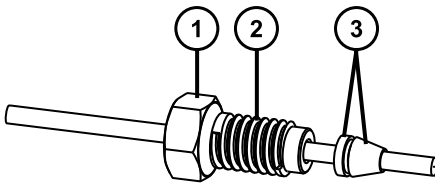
Metallic fitting with short or long flats and two-piece metallic ferrule, first-use tightening
